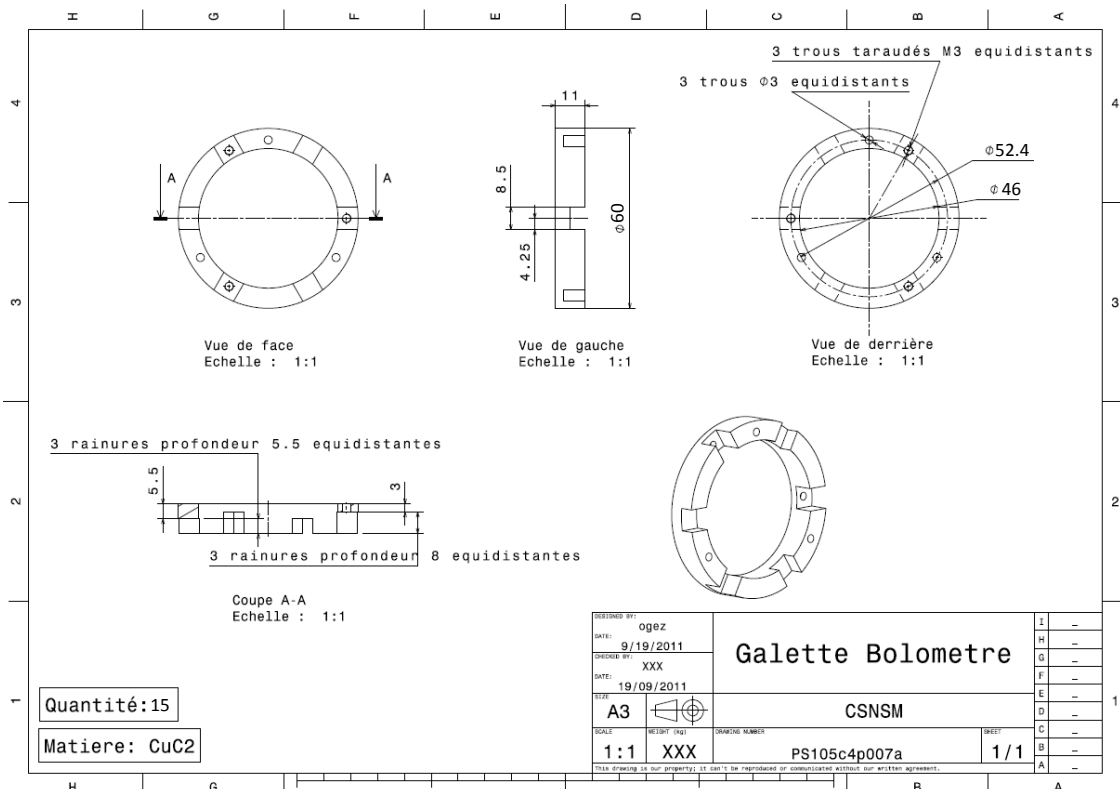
Technical drawing of the copper holder for LUMINEU light detectors.
